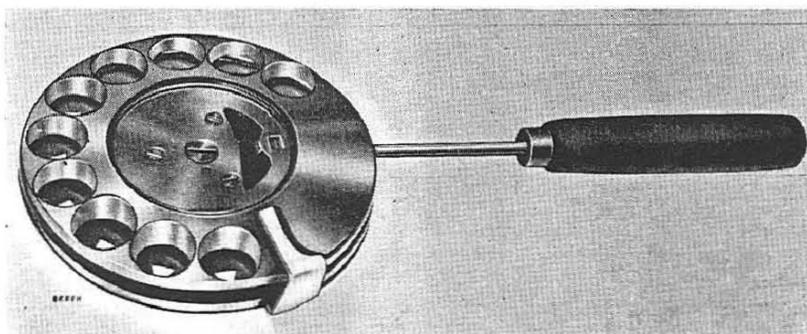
MOULDED BODY DIAL—REMOVAL OF LABEL PROTECTOR WITH SCREWDRIVER
